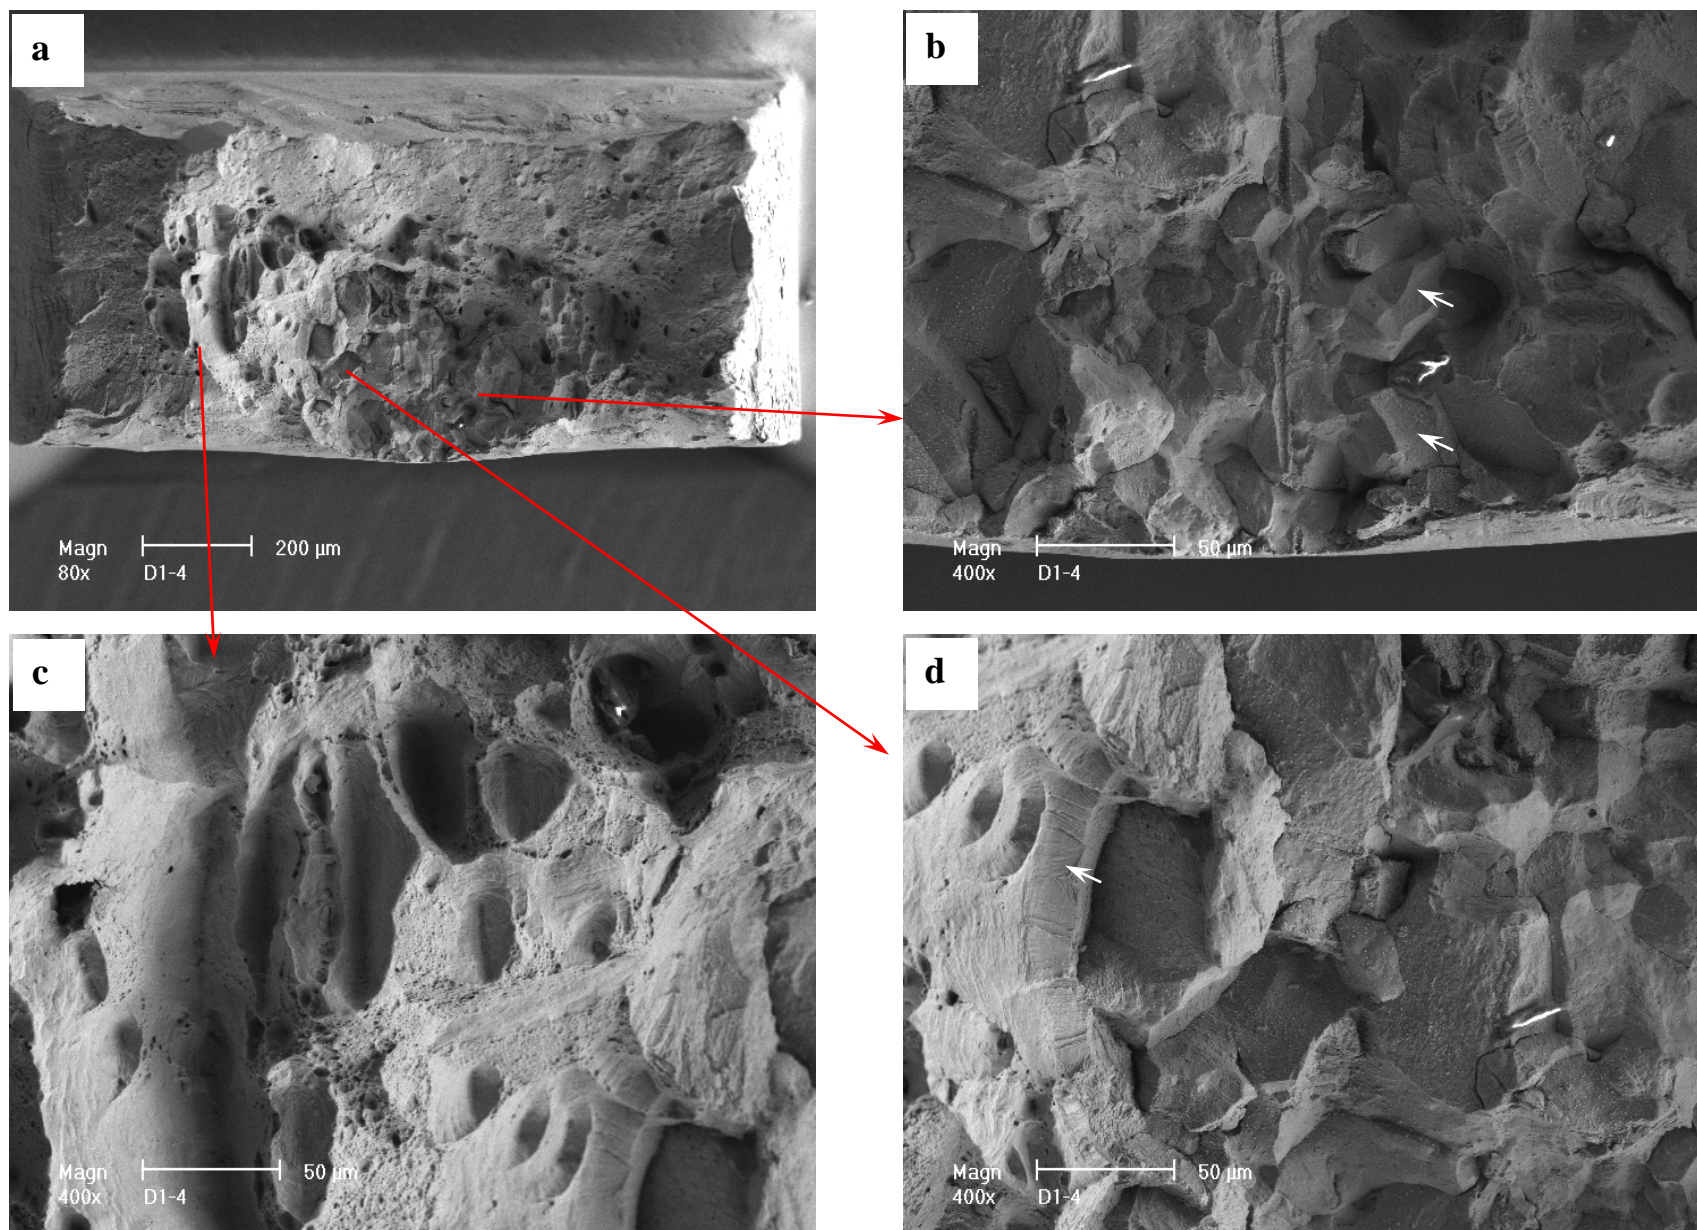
Fracture surface of SA Type 347 SS irradiated to 45 dpa and tested in PWR water (specimen D1-4).
